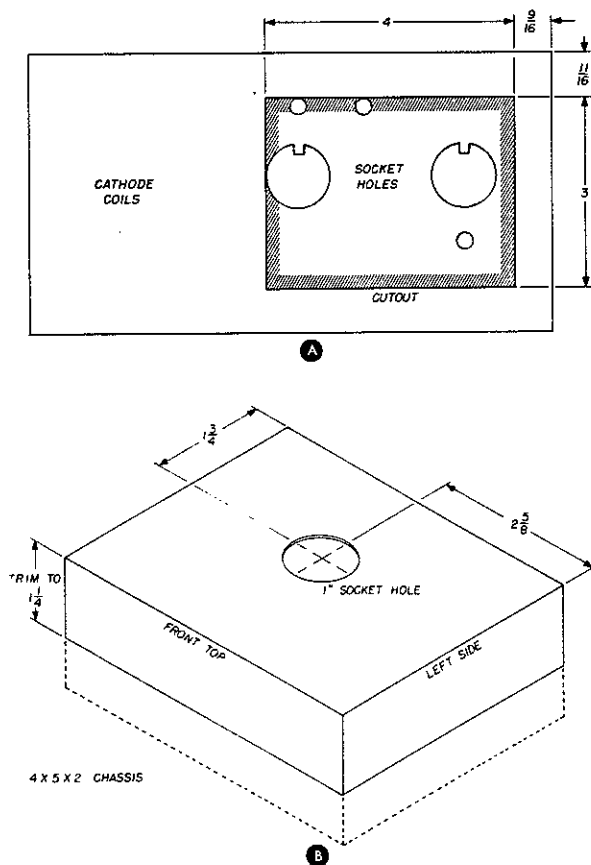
SB-200 chassis modifications to accommodate the 8875. The enclosure cutout for the sub-chassis is shown in A. The modified sub-chassis for the 8875 socket is shown in B.
